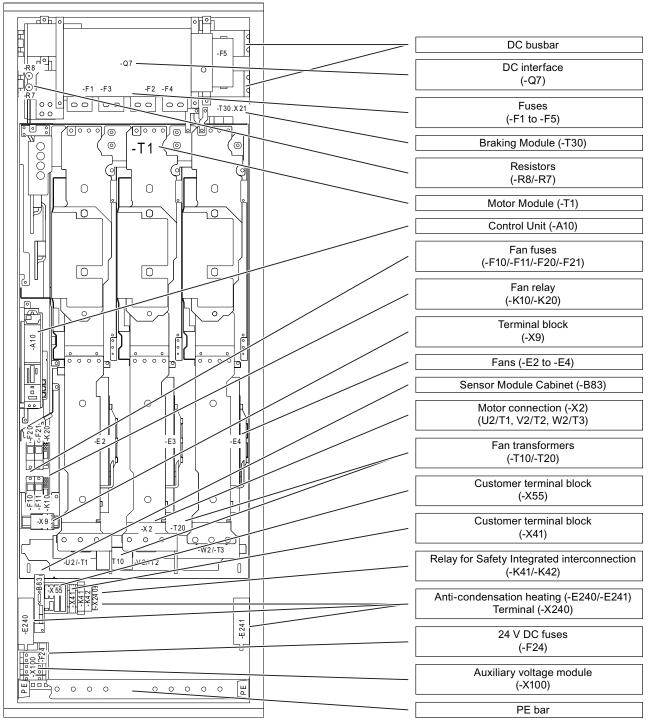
Configuration of Motor Modules in chassis format (frame size JX)
